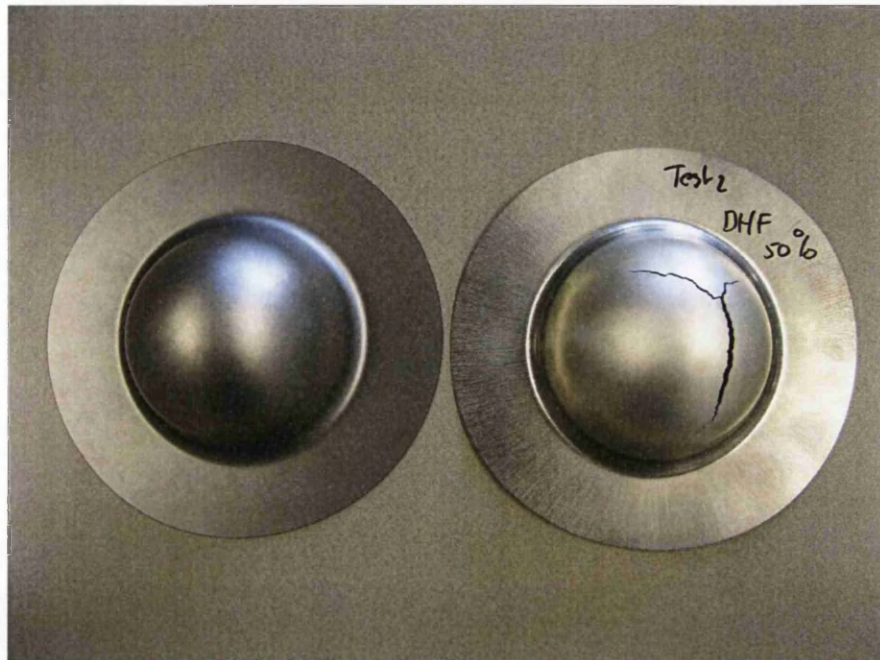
Blank that was drawn and not stretch due to insufficient blankholder force.
